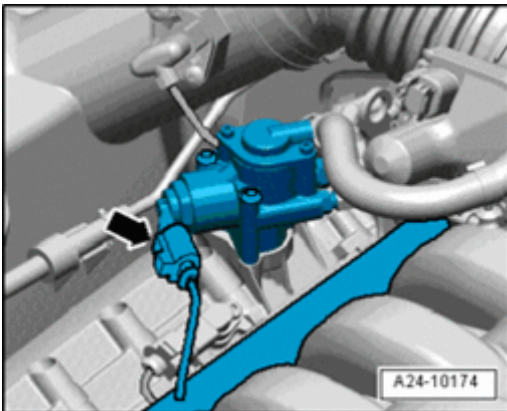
Disconnecting Electrical Connector At Fuel Metering Valve 2 N290 On Right High Pressure Pump
